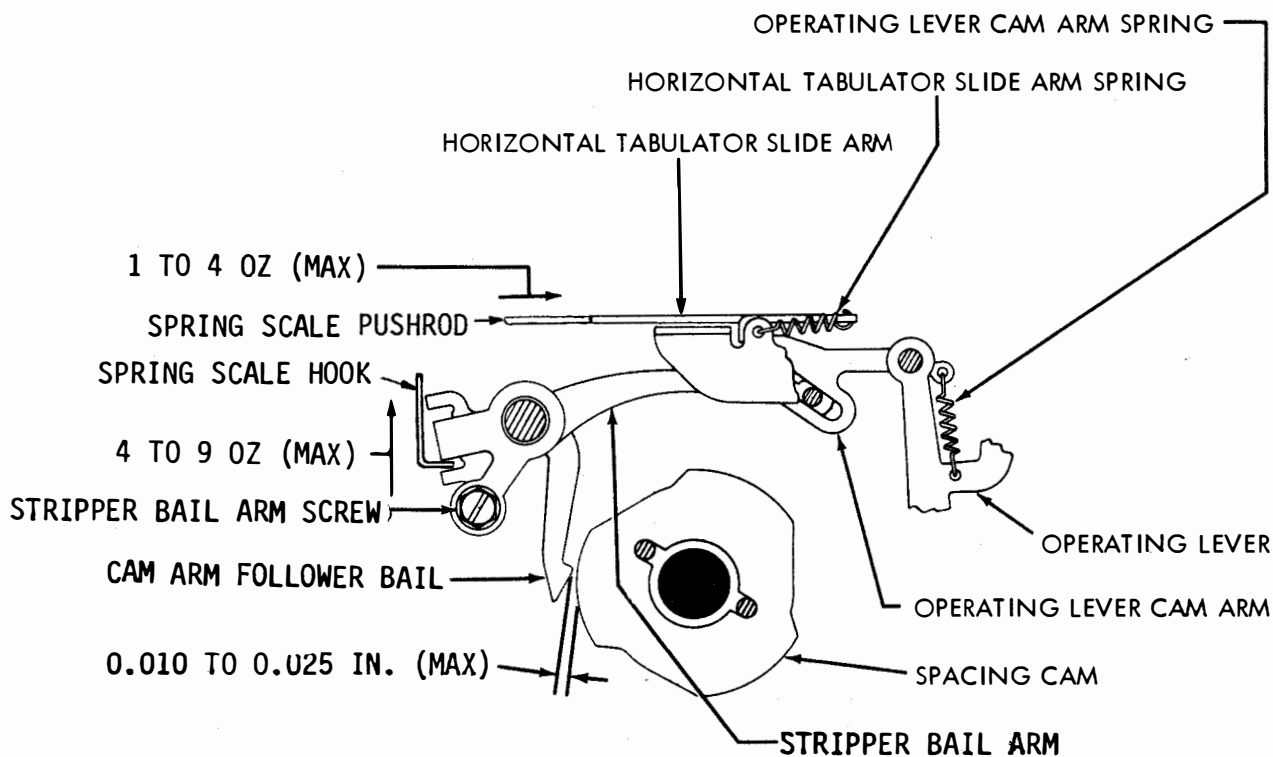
Cam Plate Stripper Bail, Horizontal Tabulator Slide Arm Spring, and Operating Lever Cam Plate Spring, Left Side View
